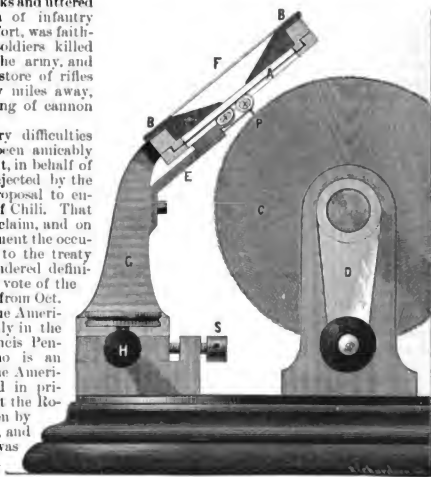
DIAPHRAGM AND POINT IN POSITION—SECTIONAL VIEW. A, diaphragm; P, point; C, cylinder; D, crank; BB, rubber disk.
